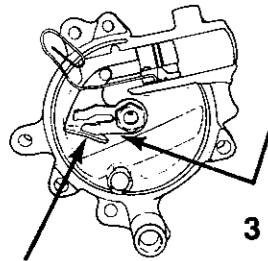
CHOKE QUALIFYING (INTEGRAL CHOKE) ADJUSTMENT
